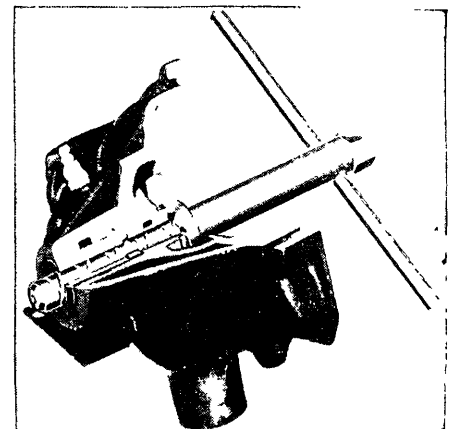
Showing use of flat bar in burnishing bushings and facing seal surface of housing. 1935-52
